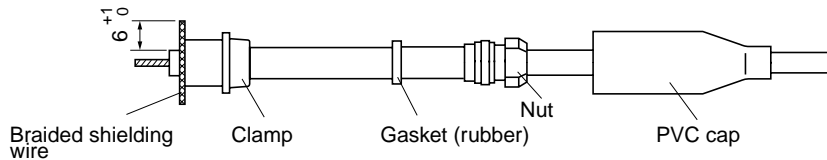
(4) Mounting of Coaxial Cable Connector and Treatment of Shielding
